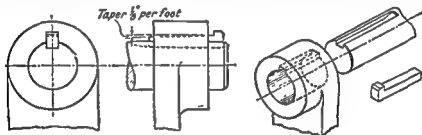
Lever fitted to Shaft with Taper Gib Key.
